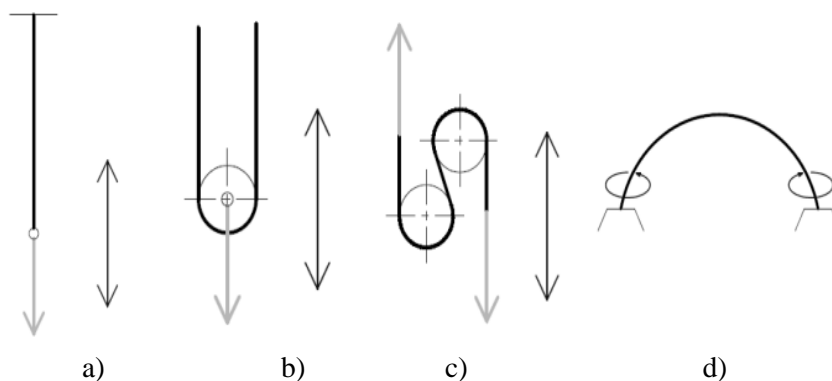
Wire rope fatigue test systems: a) tension; b) simple bending; c) reverse bending; d) rotary bending [6]
